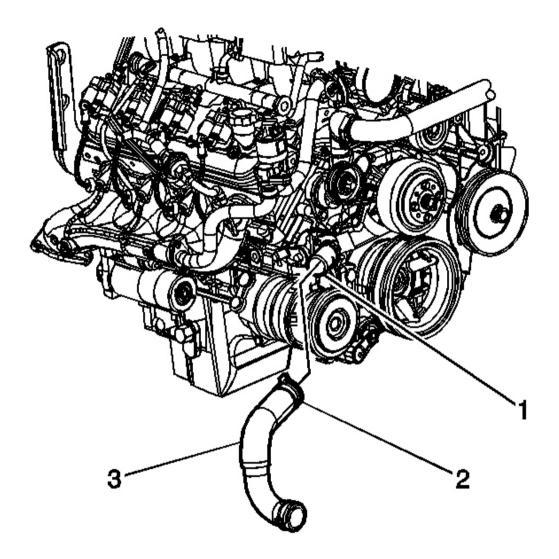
Radiator Hose & Engine (Outlet) Courtesy of GENERAL MOTORS CORP.
